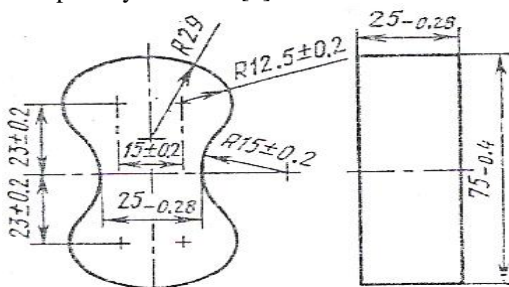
Shape of core tensile strength test specimen (dimensions are in millimetres)
